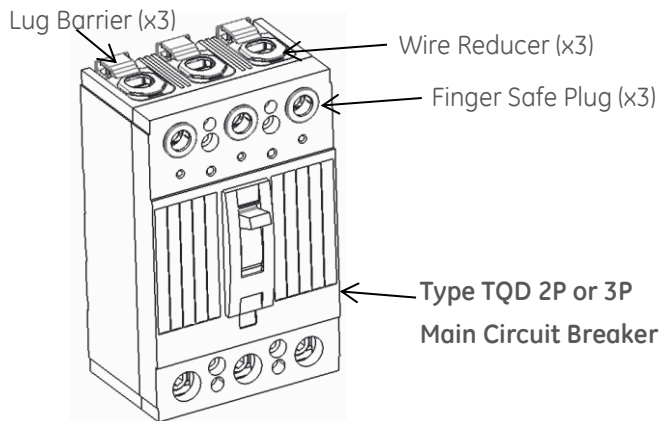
Fully Assembled Lug Barrier, Plug & Reducer
